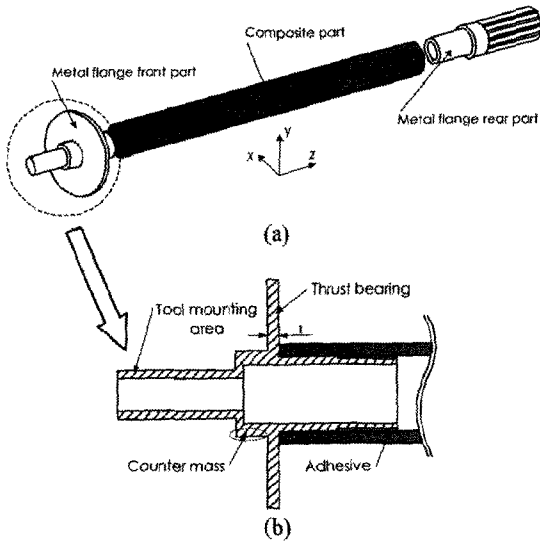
Schematic diagram of the composite shaft; (a) Composite shaft with the built-in motor and metal flange part, (b) Enlarged view of the metal flange front part
